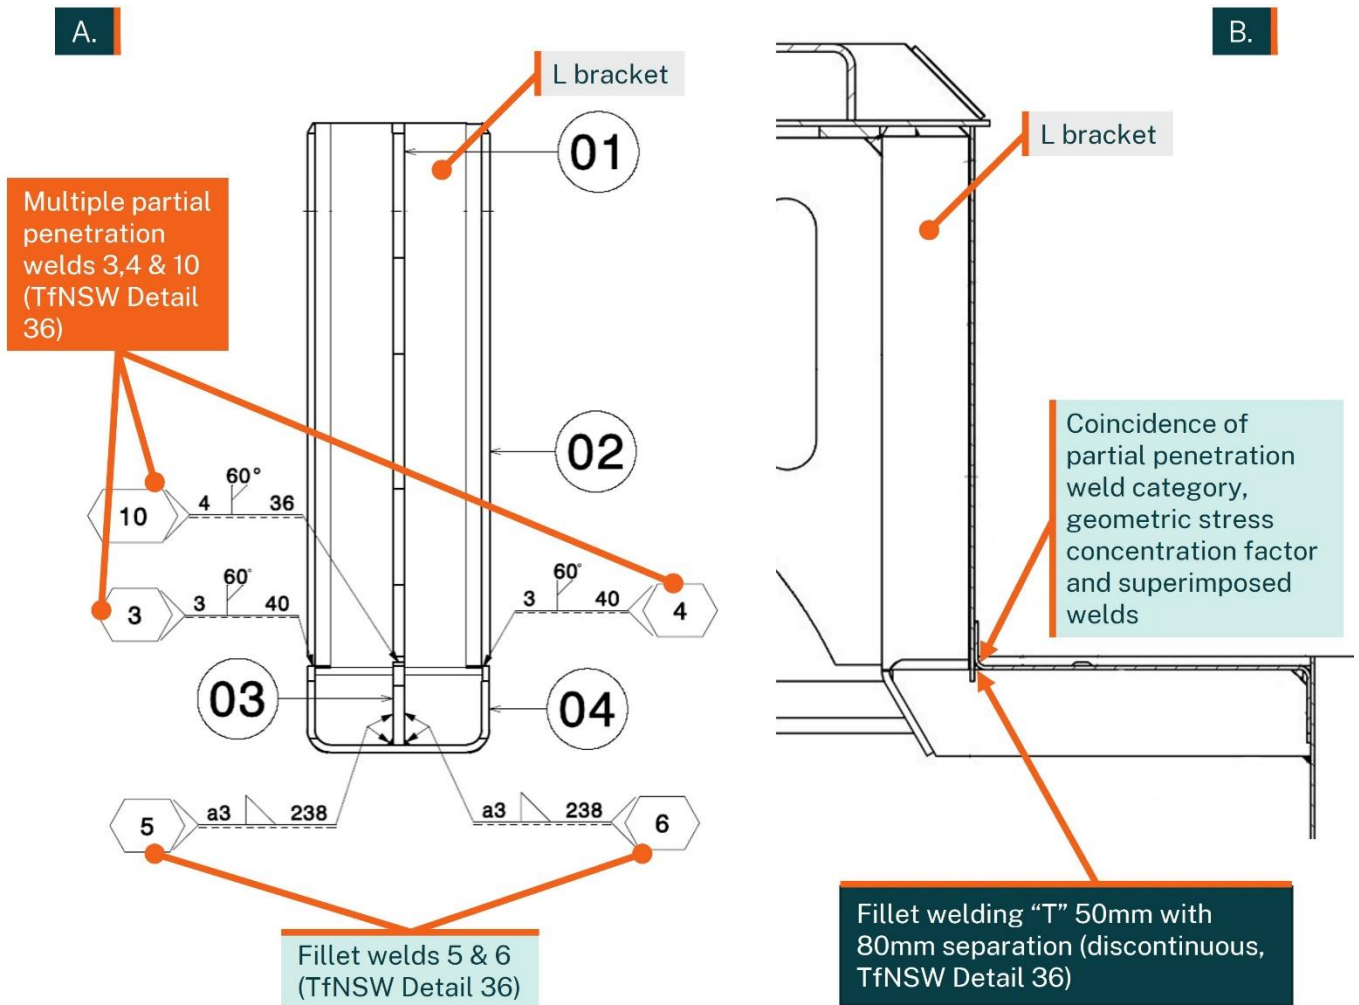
Image A details a front view L bracket assembly drawing with weld identification numbers 3, 4, 5, 6 and 10. Corresponding TfNSW weld detail categories are labelled. Image B identifies a side view assembly drawing of the L bracket and bogie box sheeting (in cross section) noting the fillet discontinuous 'T' welding and coincidence of partial penetration welds at the L bracket corner and bogie box sheeting corner construction.
